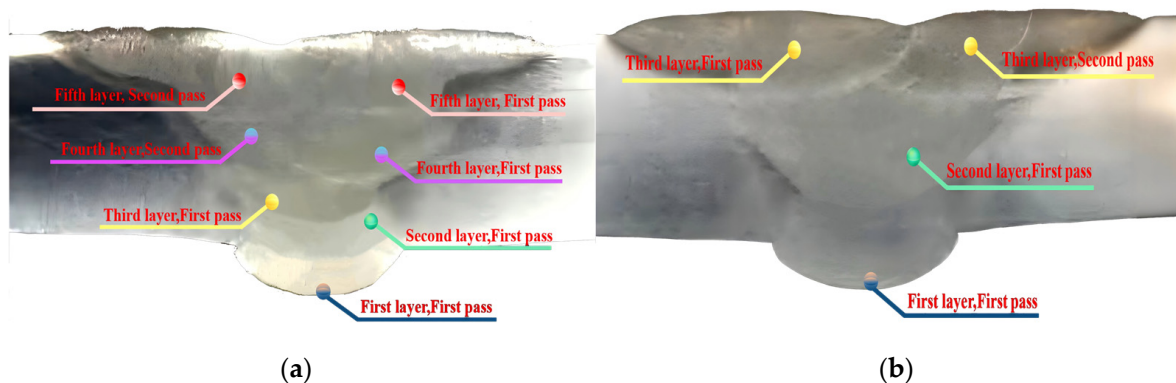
Automatic welding equipment welding process renderings. (a) Panel multi-layer and multi-pass welding process effect. (b) Web multi-layer and multi-pass welding process effect.
